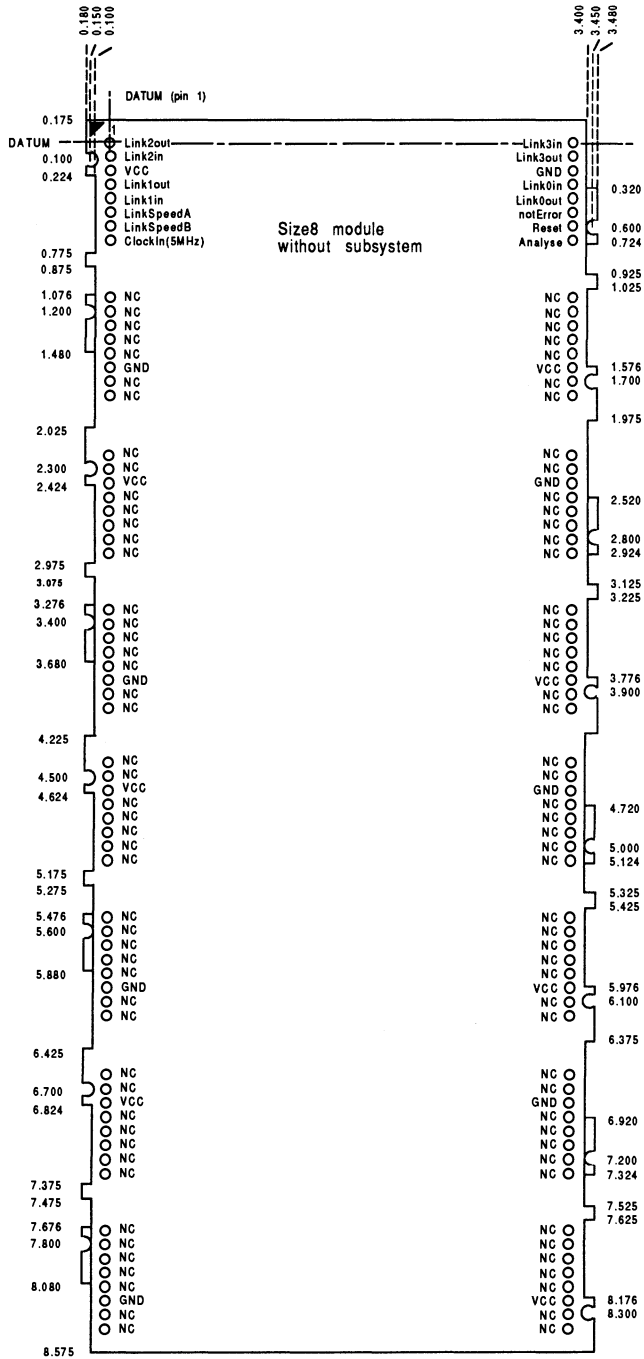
IMS B407 outline drawing (All dimensions in inches)
